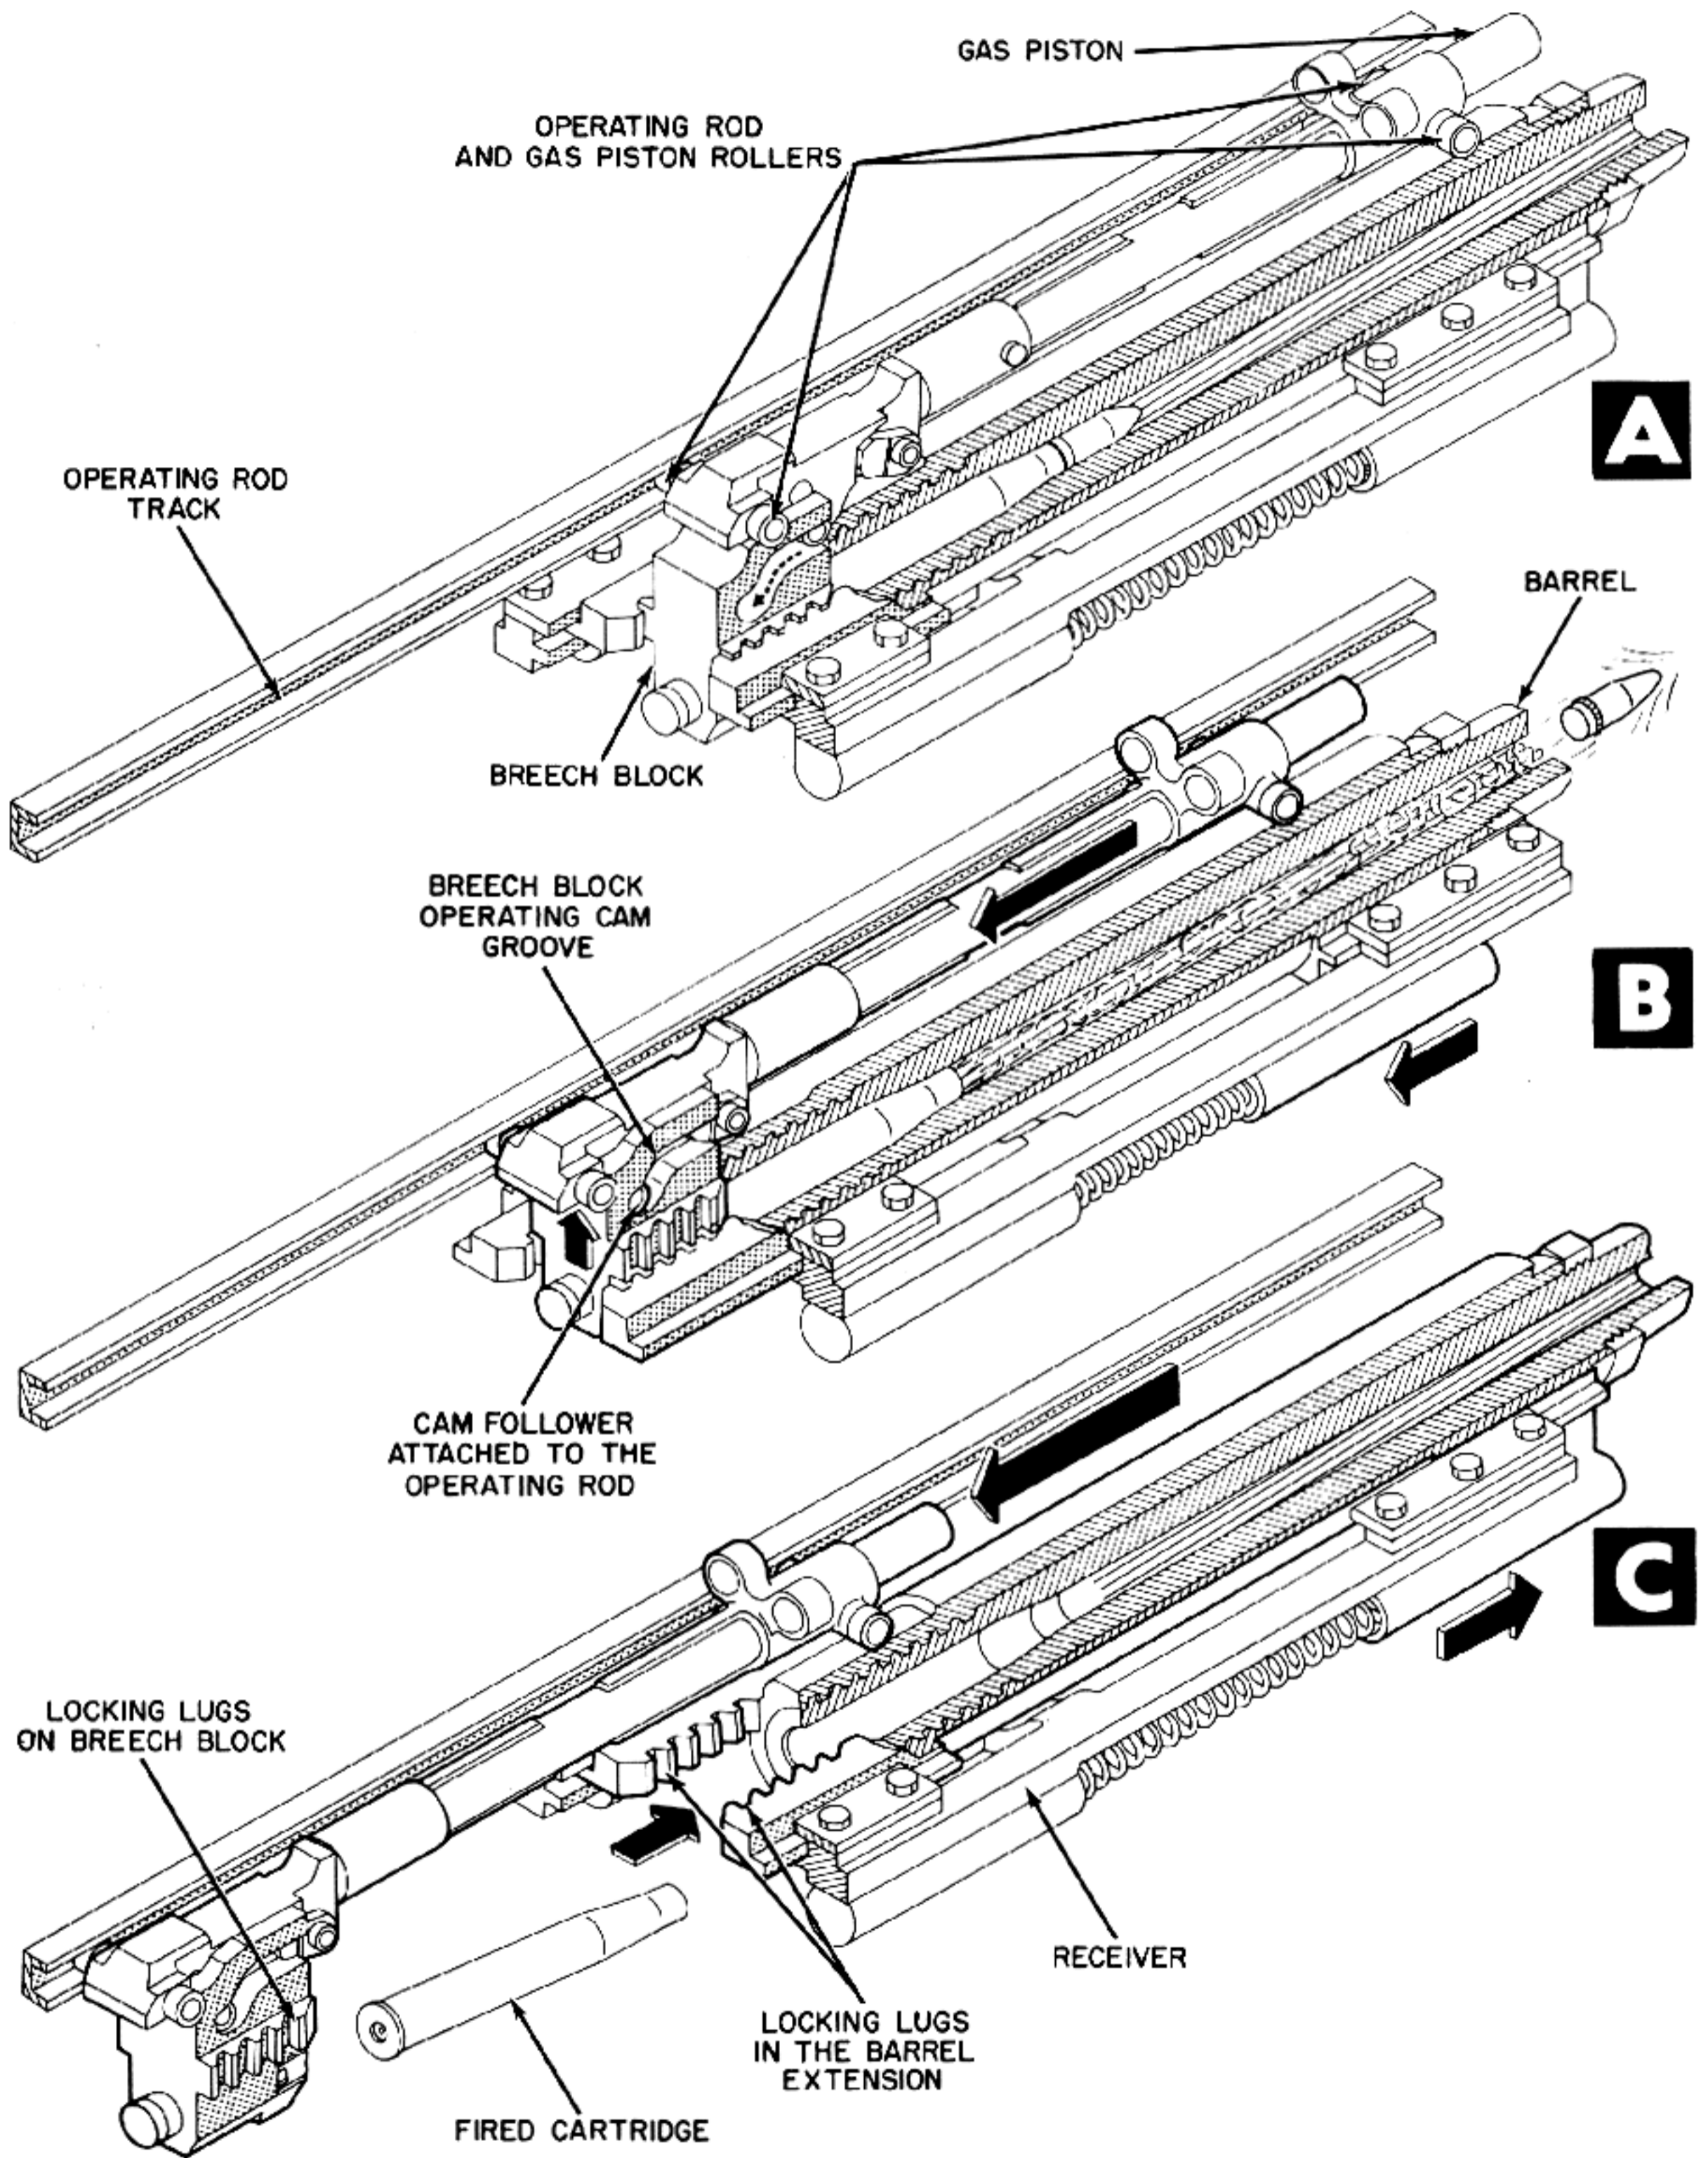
Operating Rod Cams Breech Block Free of Barrel Extension.
